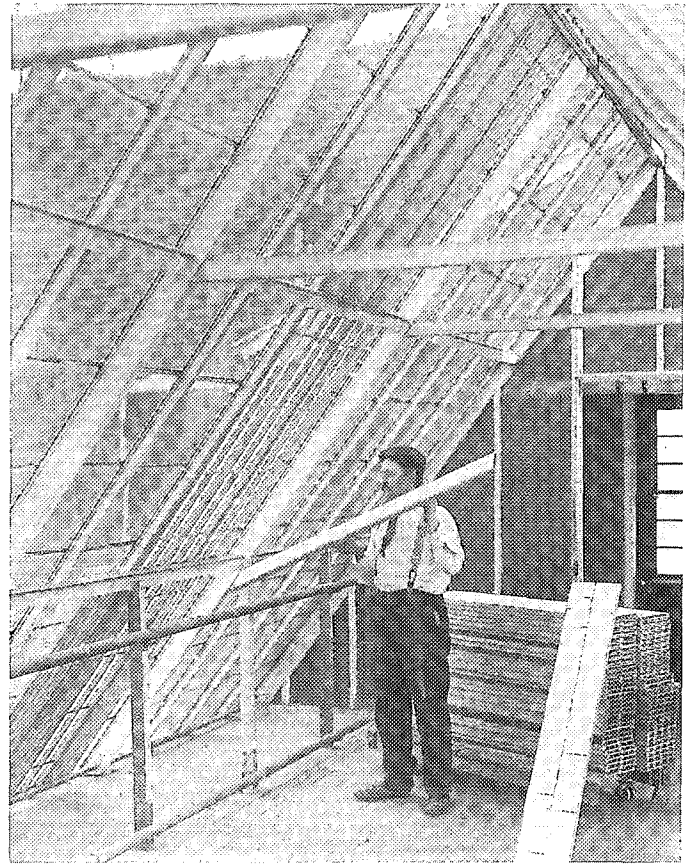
A rack of tails being "put to glass" at Wood & Brooks's unusually spacious bleach house on the roof of its main factory, 1920s. Note cartful of loaded racks. Wood & Brooks Collection.
